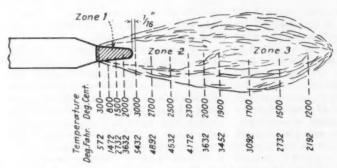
NORMAL OXY-ACETYLENE WELDING FLAME
